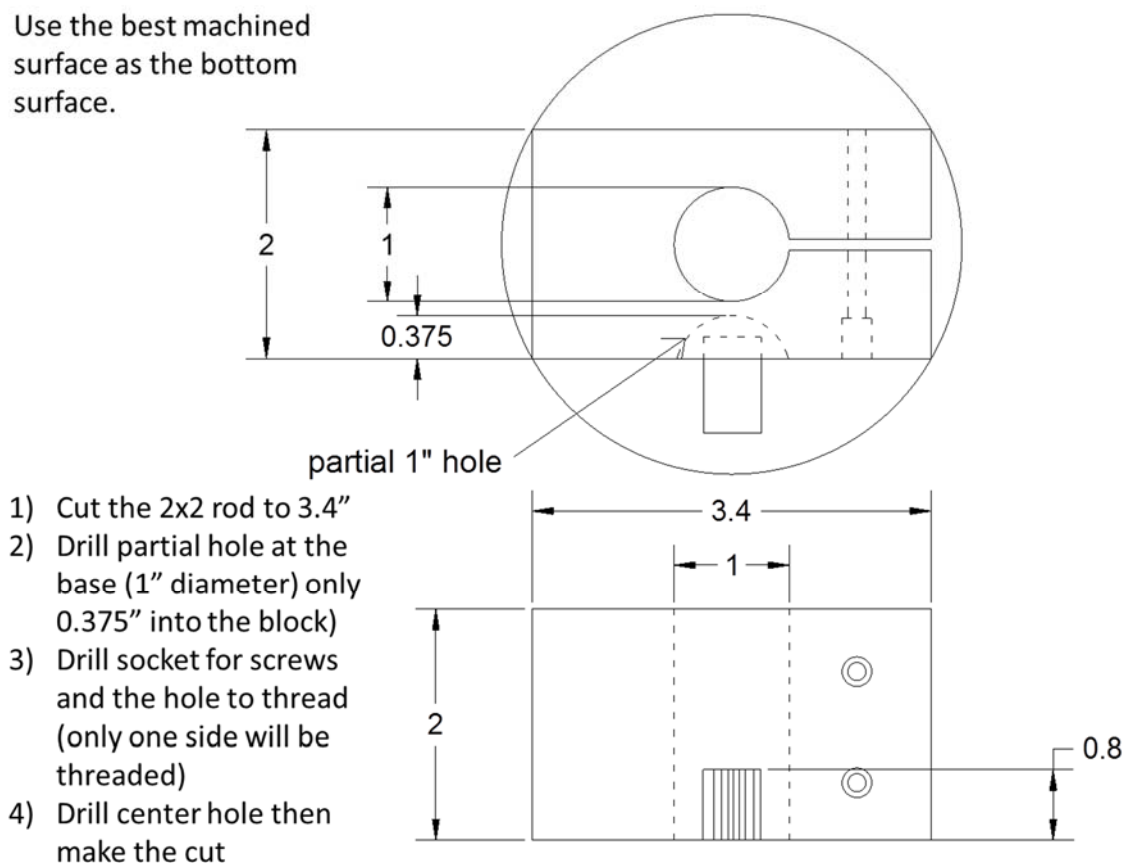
The design of the aluminum bracket for minimizing the rocking problem.
